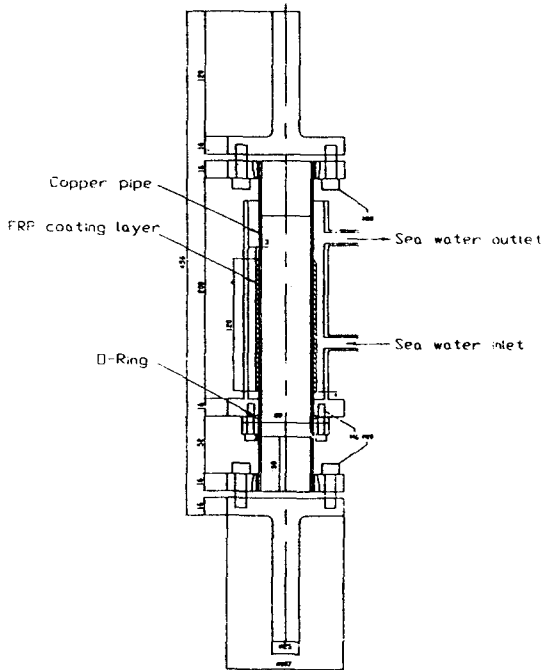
Configuration of assembled fatigue testing zig(dimension : mm)
